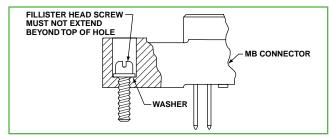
MB CONNECTOR WITH SCREW MOUNTING
